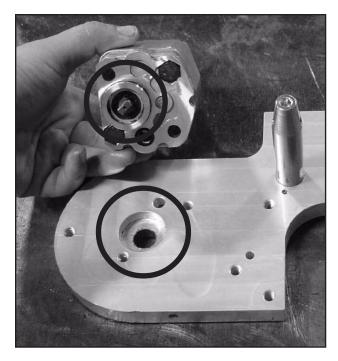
Carefully remove Pump Assembly from Base plate. Do not damge the boss where the o-ring seats.
